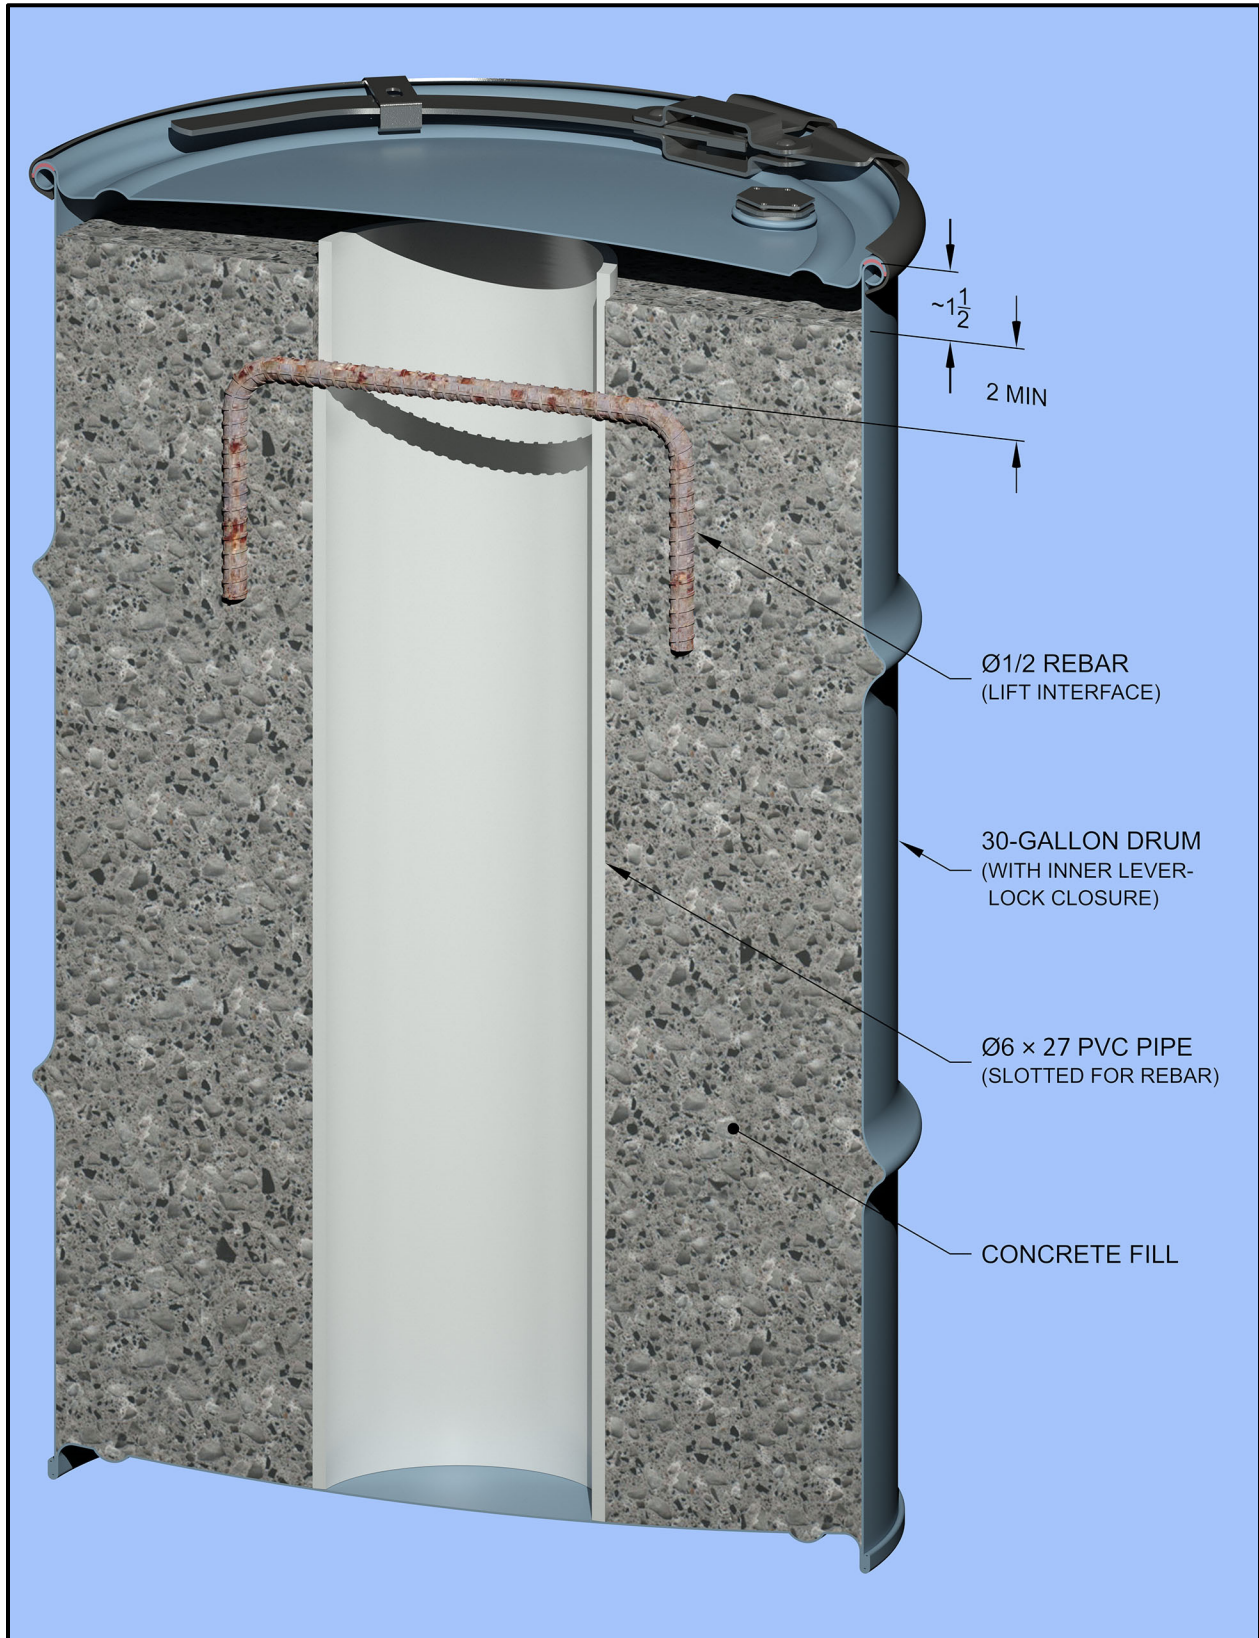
30-Gallon Payload Drum with Concrete Ballast
